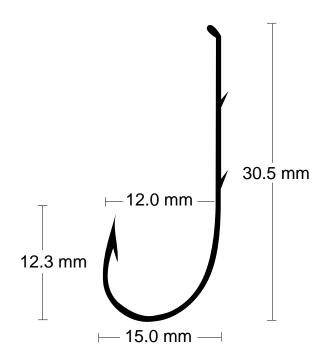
Nominal dimensions (mm) of the hook used in this study.
